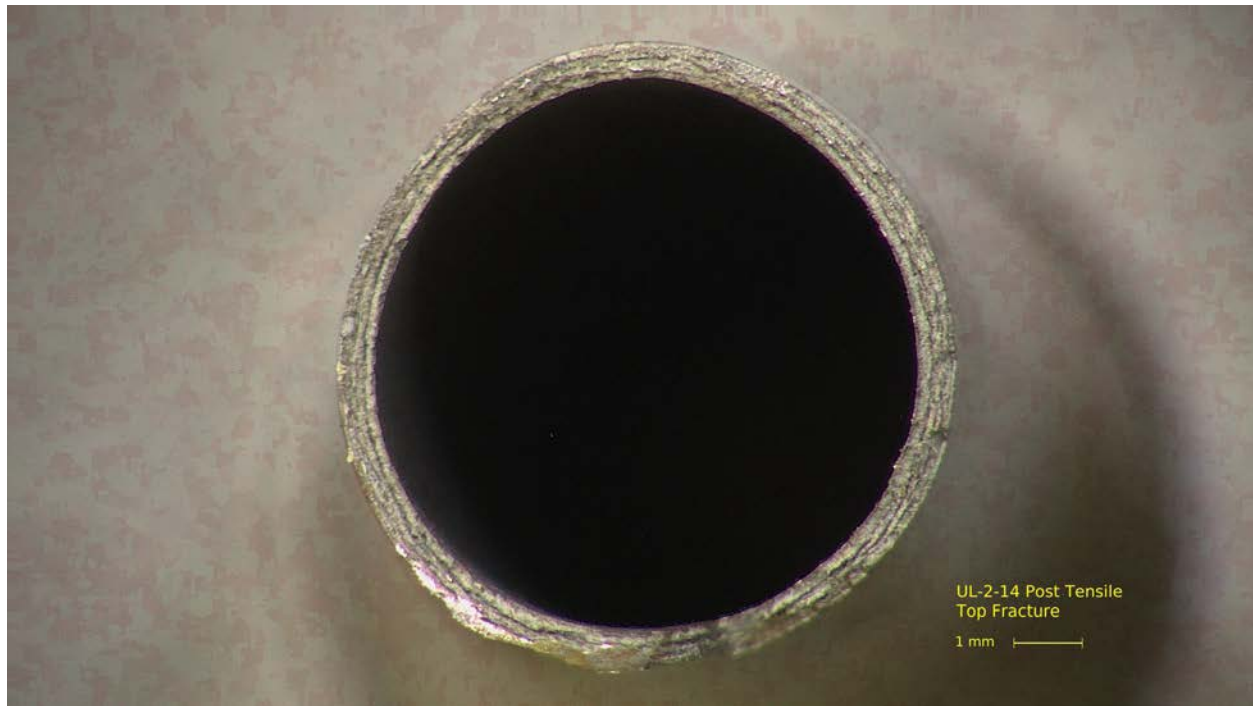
Post-Tensile Image Top Fracture for UL-2-14
